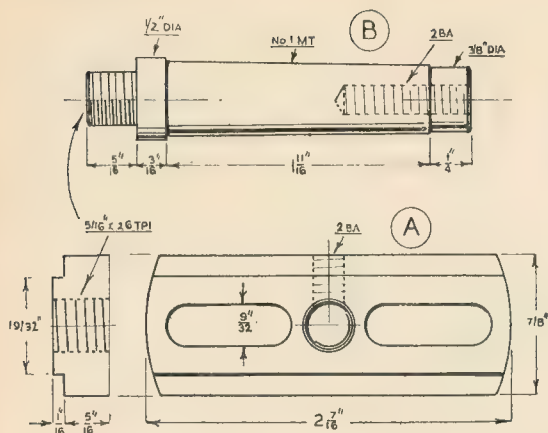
The base of the attachment—A; and the Morse taper arbor—B
